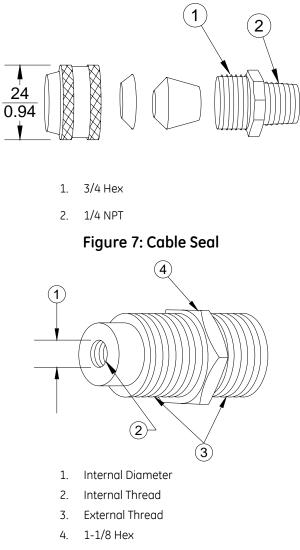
4190 Adapter - 304 stainless steel (-34 Shown)
